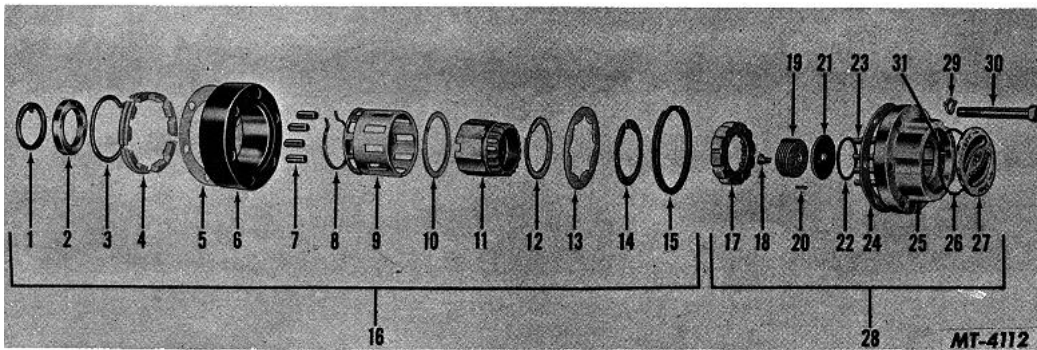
Locking Hub (Lock-O-Matic) (Exploded View)
